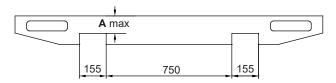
Z-45-110, Z-75-110, Z-45-90, Z-75-90 ZU-45-110, ZU-75-110, ZU-45-90, ZU-75-90
